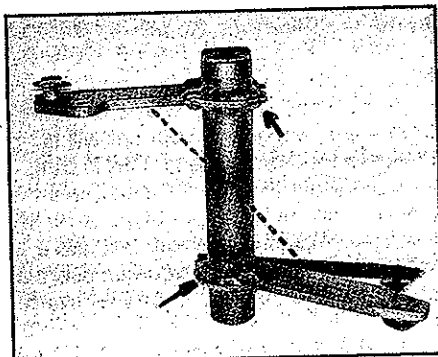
We beefed this torque shaft with two welded pieces (arrows) that change the design from a basically butt-welded setup to a full-circle design. Another approach is add gussets (dotted lines). Always check for clearance before making any irreversible modifications.
